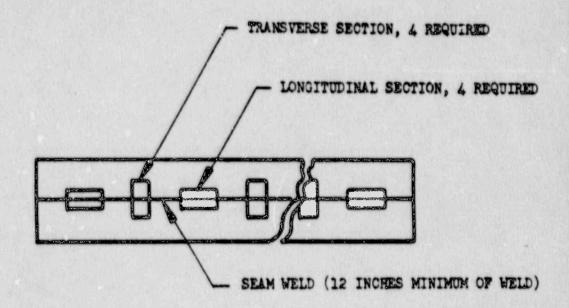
Qualification test specimen, class A seam welding foil thicknesses.
